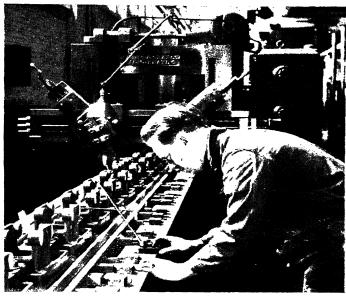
Layout with a surface gage. Using a Universal surface gage in layout work. Whiting is spread on the surfaces to be laid out, and the sharp point of the gage scratches a fine line by removing a very thin strip of the whiting. Prussian-blue pigment in oil or light grease is often used in place of whiting. A large flat surface is necessary to do this work, and, as in the present illustration, the planer table does very well. (Brown and Sharpe.)
